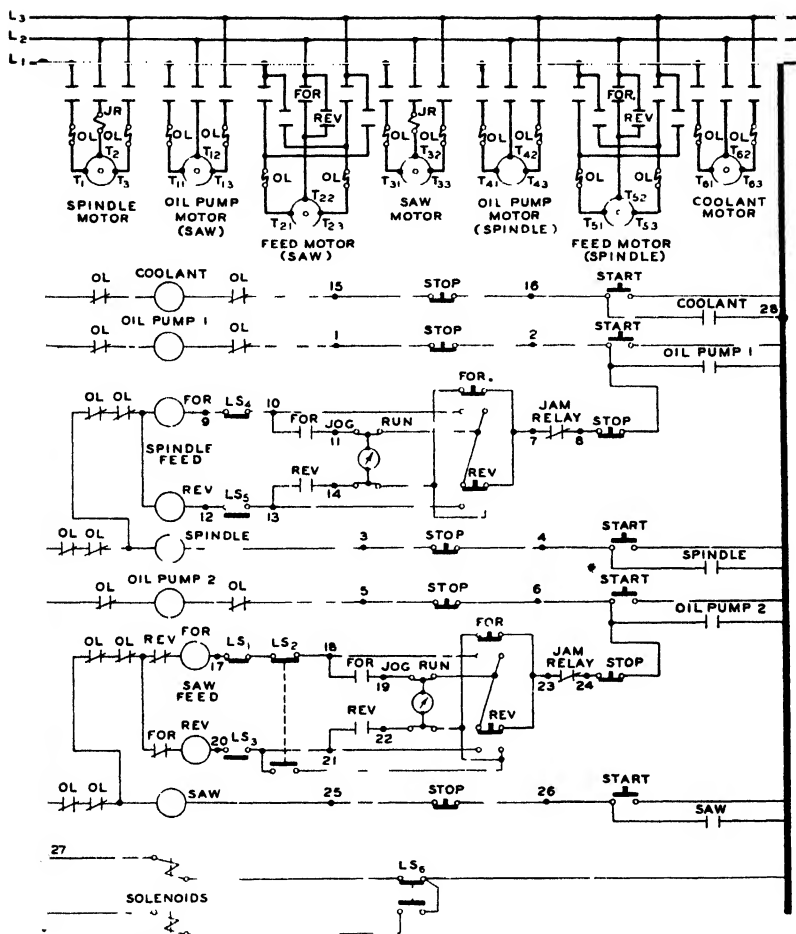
Elementary or Lane Diagram for Control Panel on Seven-Motor Spar Milling Machine
